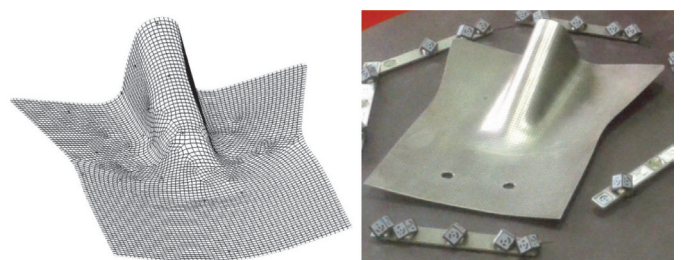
View of drawpiece shaped elastomeric punch with hardness 90 Sh A a) FEM model b) industrial experiment
